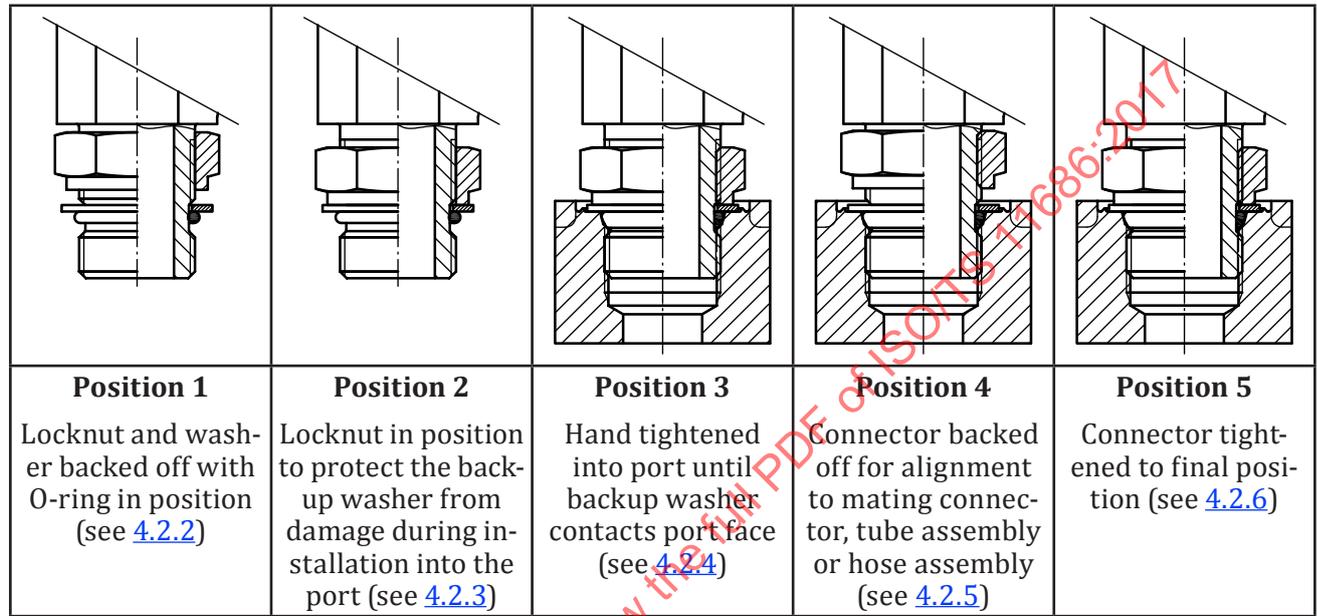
Instructions for assembling connectors with adjustable stud ends and O-ring sealing
